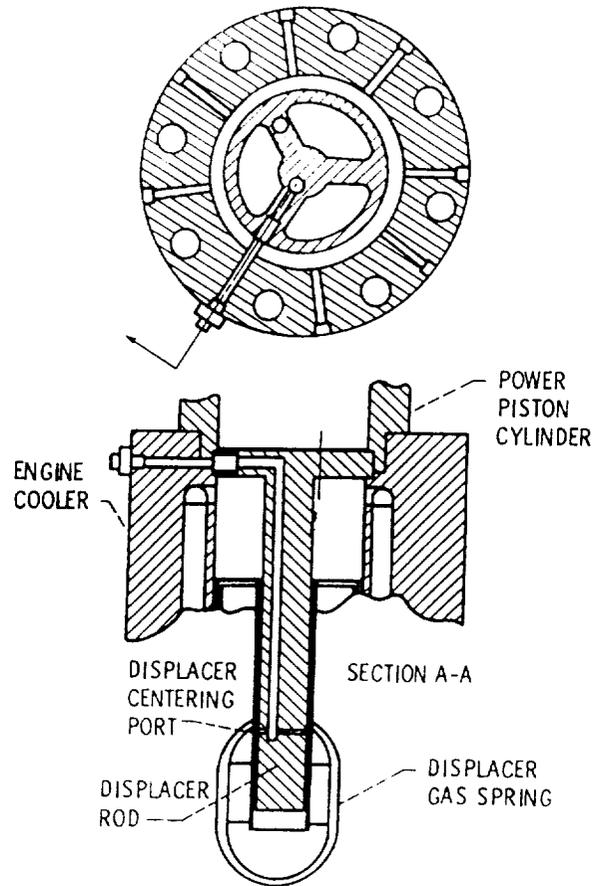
DISPLACER ROD MOUNTING AND COMMUNICATION PORTS FOR RE-1000 ENGINE.
